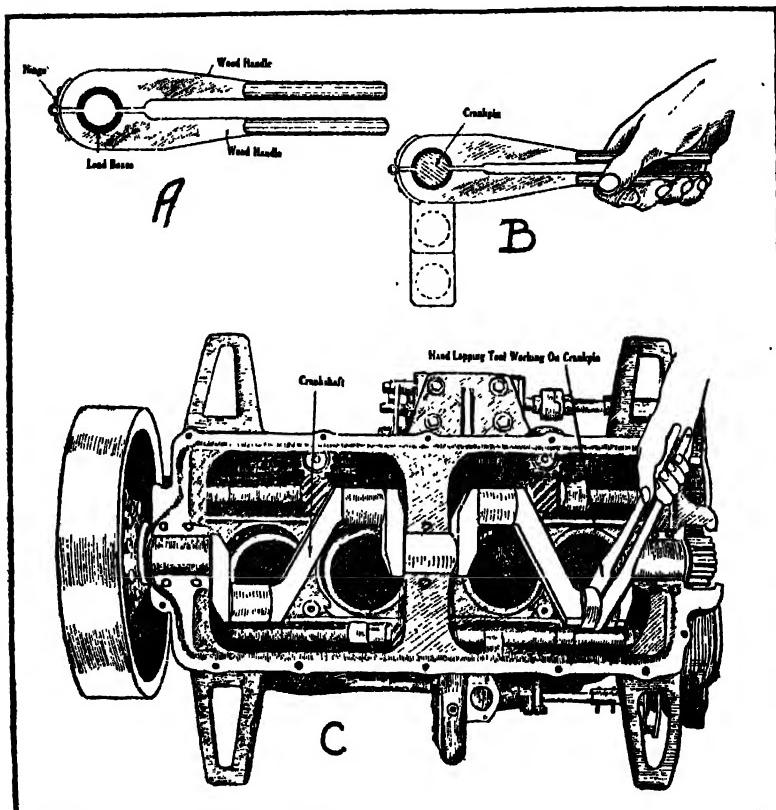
Simple Lapping Tool for Crank Pin and Method of Use.
